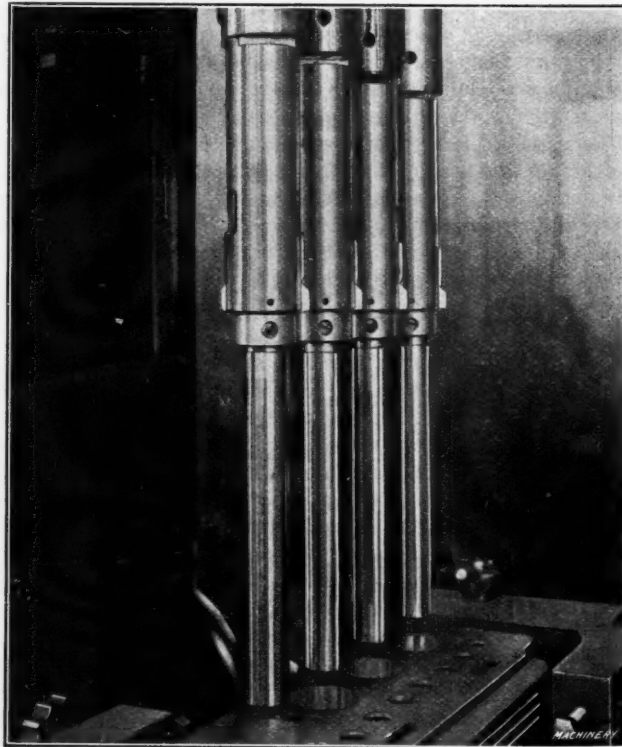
Close View of the Kelly Boring Tools used for roughing out the Cylinder Bore
